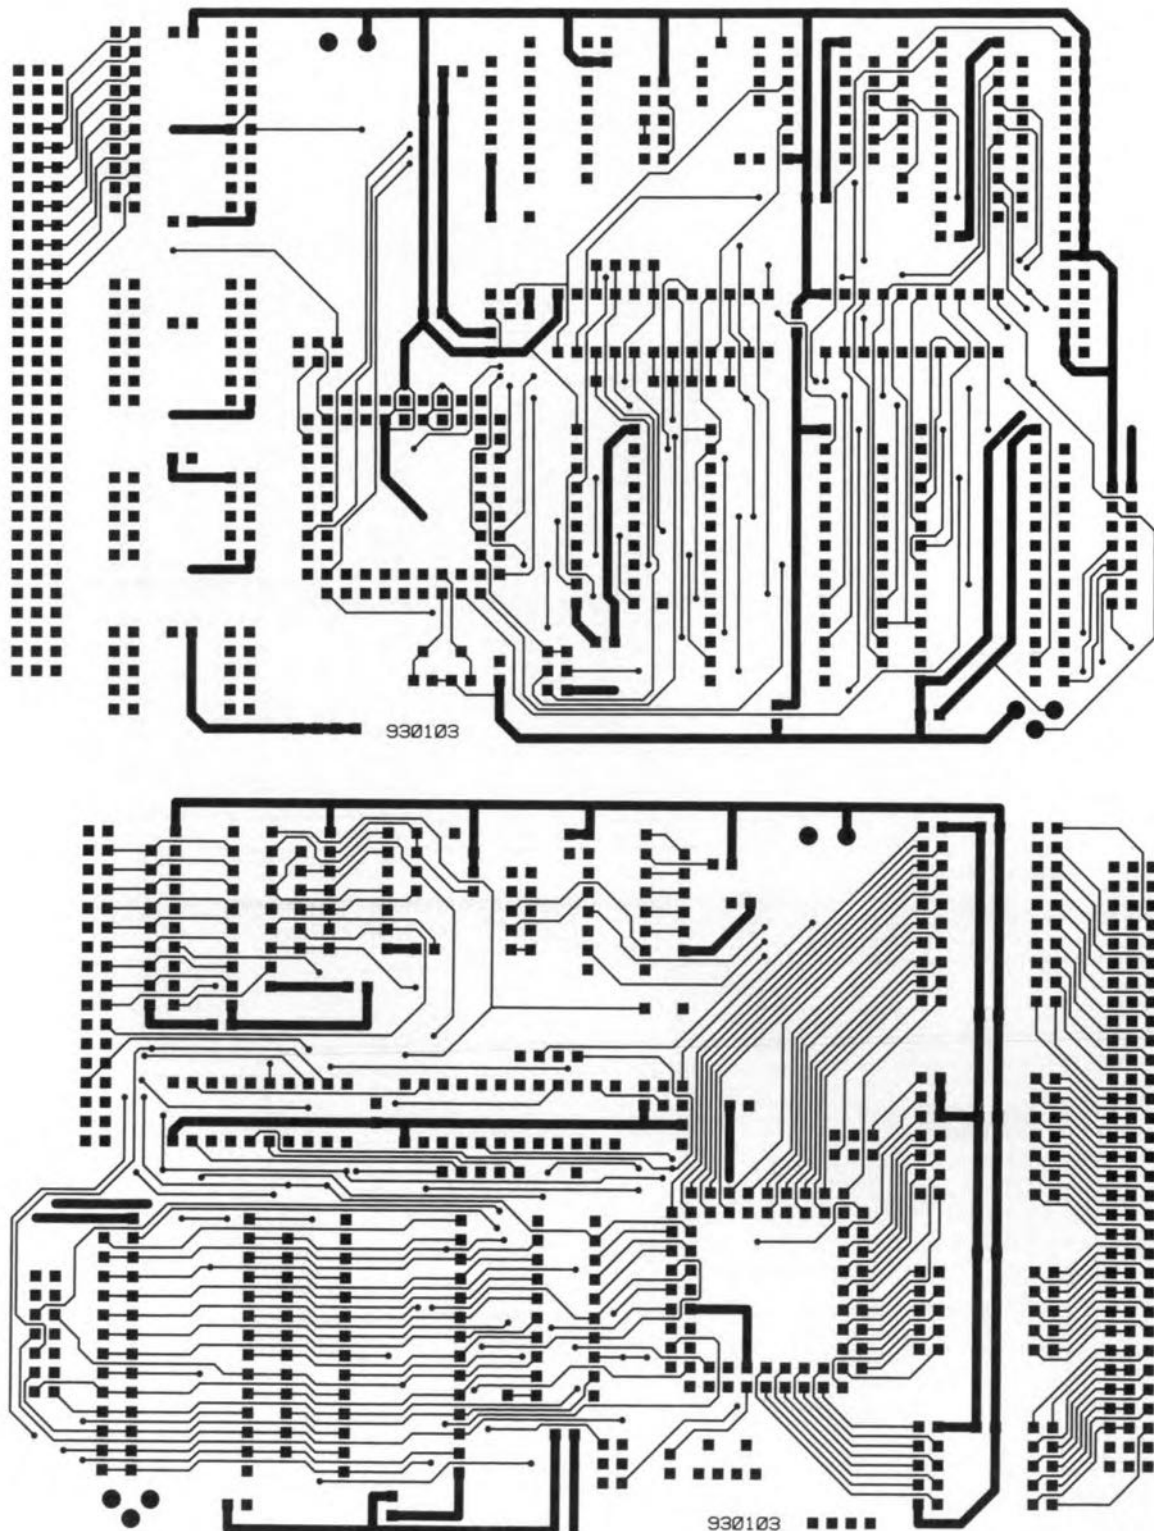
Track layouts of the double-sided through-plated printed circuit board designed for the 535 system.
